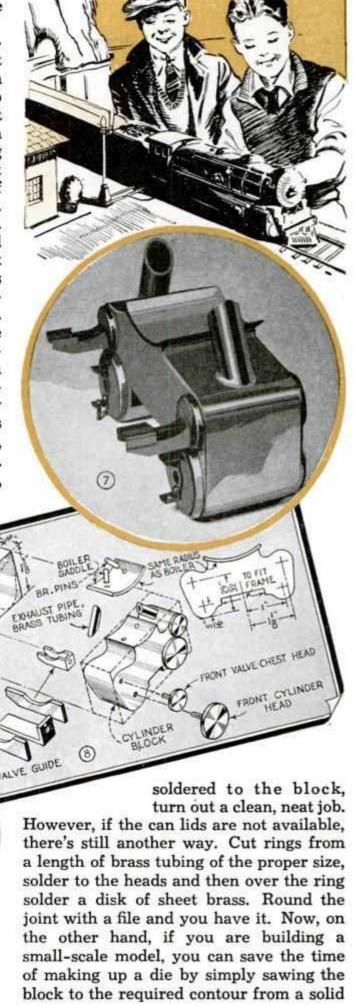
shows what you can do in making up a cylinder block entirely of sheet metal. The hardwood forming die shown in Fig. 9 is the secret. When you make up the die remember that No. 22-gauge soft brass is the best weight metal to use in forming the block and the trick in sawing out the die is to select a saw blade that will give, as near as possible, a width of cut equal to the thickness of the metal. Outside of this, Fig. 9 is self-explanatory. Fig. 10 shows the outer sheets pressed to form in the die. The ends of the block are sawed to the rough form and one is soldered in place. Then the die is removed by collapsing the inner sections. Soldering on the other end completes the block ready for the heads and boiler saddle. On the larger scale models, a friction can lid will solve the cylinder-head problem nicely. The blueprints will usually give the diameter of the cylinder head as 1½ in. when the model is ½-in. scale, while the valve heads are generally 1 in. in diameter. Can lids of these diameters,
